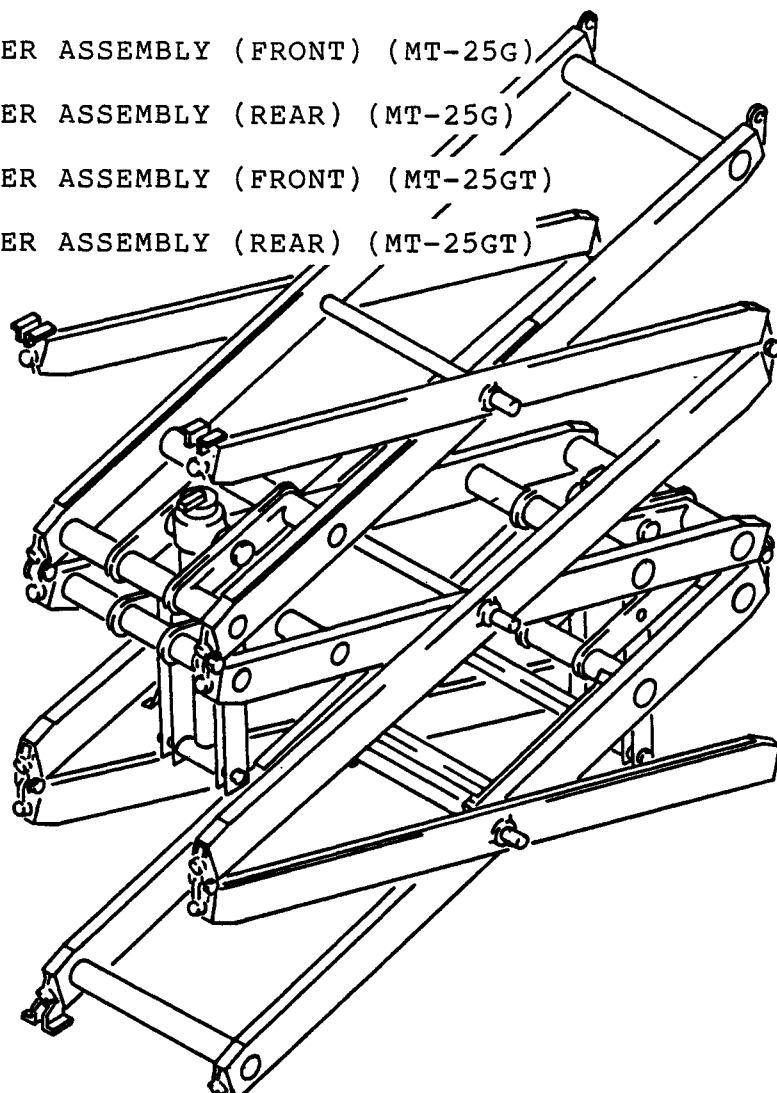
INNER ARM SUPPORT ASSEMBLY
